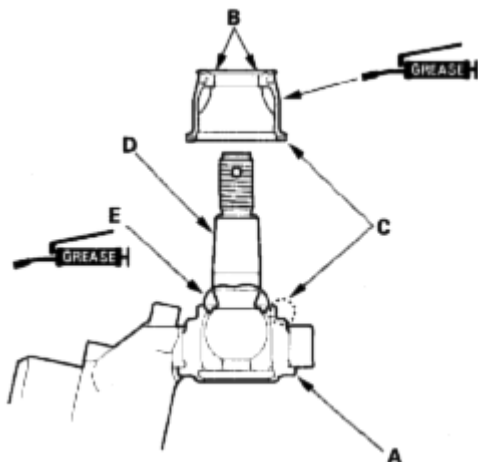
Identifying Gap Between Ball Joint And Knuckle
